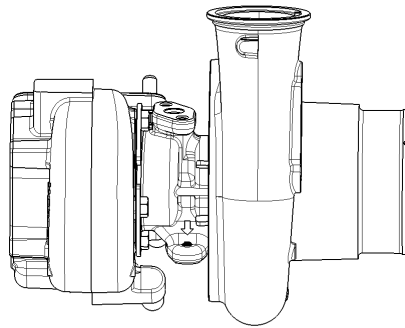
Isometric view of the turbo-compressor. With the left side being the turbo and the right side the turbo compressor.
